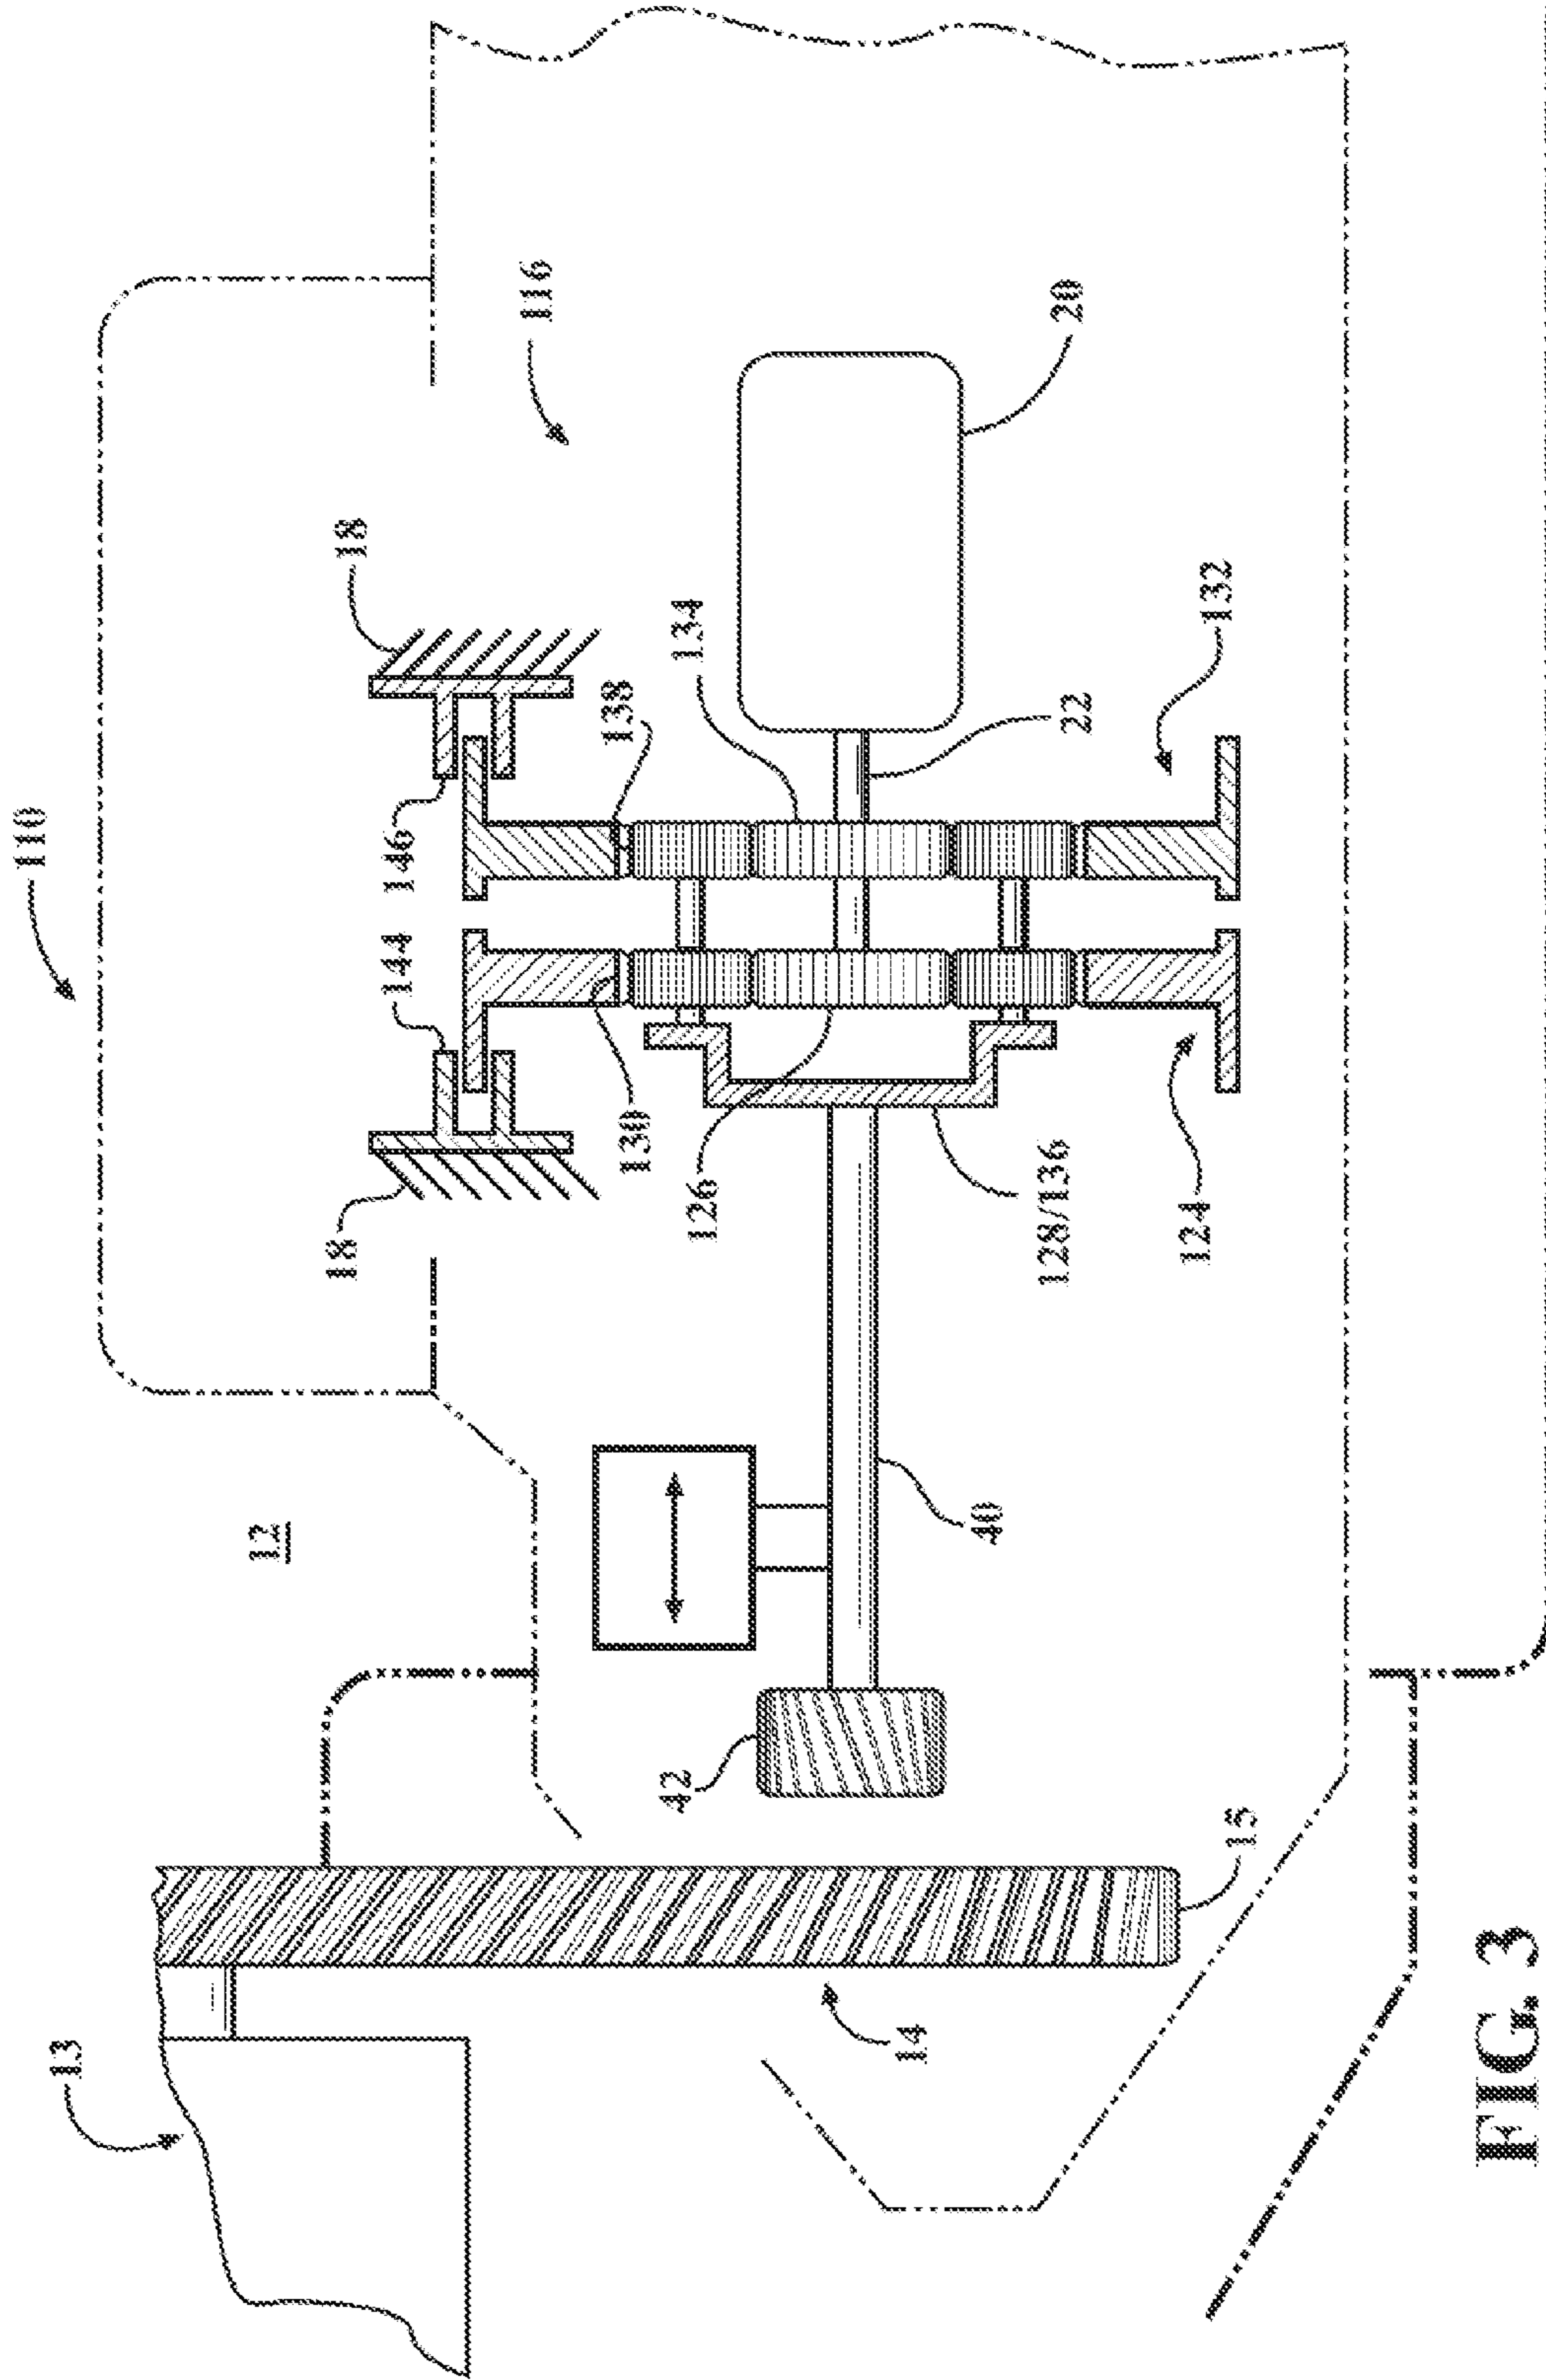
is a cross-sectional view of a mechanical assembly. The assembly includes a main shaft (40) with a central section (42) and a right-hand section (20). A housing (12) surrounds the shaft, with a cover (13) on the left. A bearing (14) is positioned on the left side of the shaft. The shaft is supported by a series of bearings (124, 126, 128/136, 130, 132, 134, 138, 144, 146) within the housing. A component (15) is located at the far left end of the shaft. The entire assembly is enclosed in a dashed-line boundary (110).
